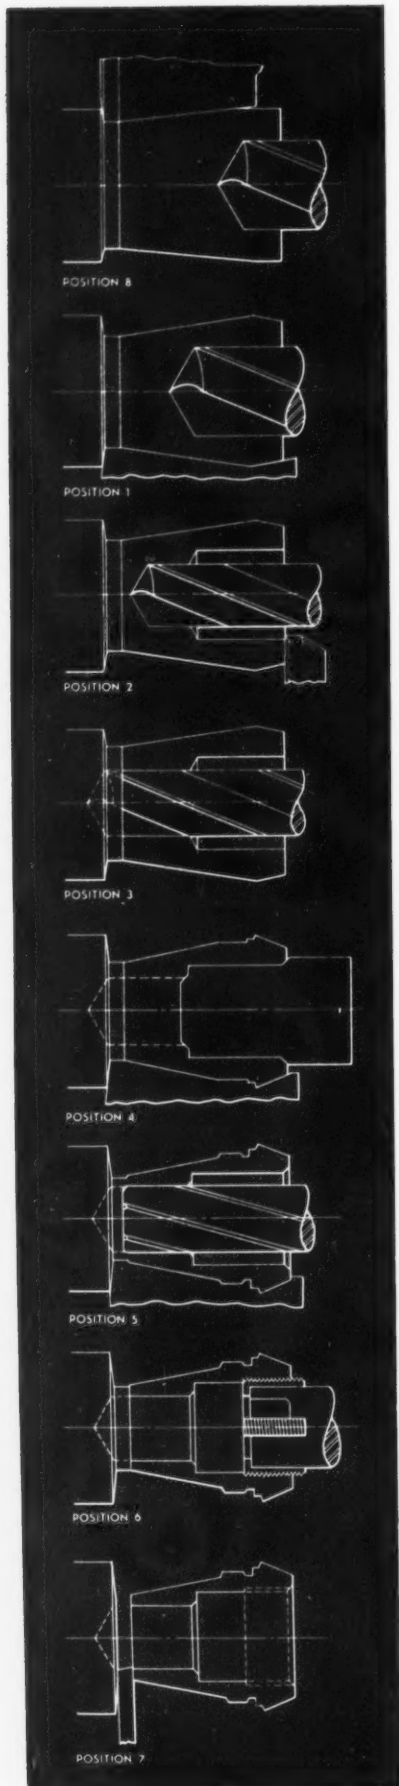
(Left) Tooling Arrangement for Making a Steel Adapter on an Eight-spindle Automatic Screw Machine
